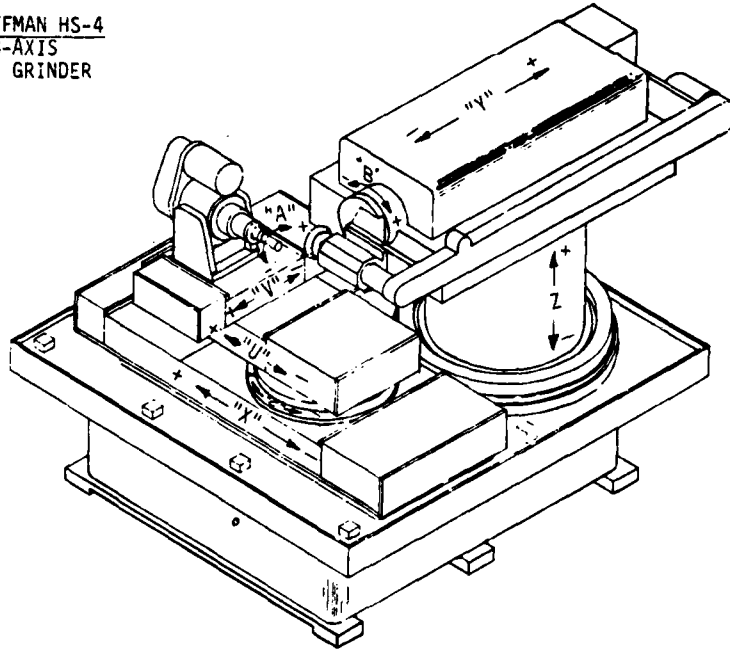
Huffman 8-Axis CNC Cutter Grinder.
